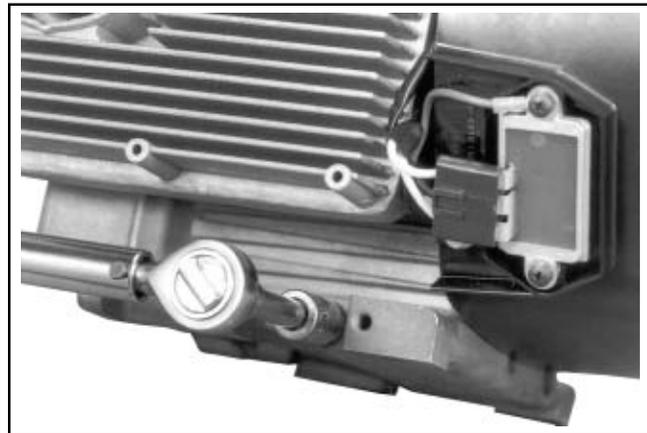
Reinstall and Torque Both Oil Drain Plugs.
